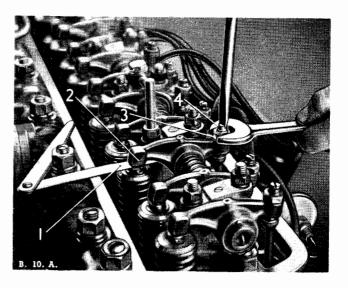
Valve adjustment. 1. Feeler gauge. 2. Rocker. 3. Lock nut. 4. Adjusting screw.
